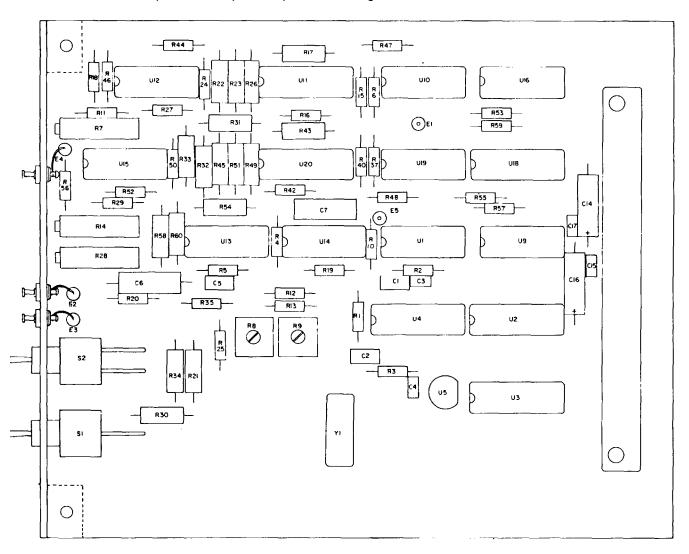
Test Generator Circuit Card Assembly, 1A3A5 Parts Location Diagram
